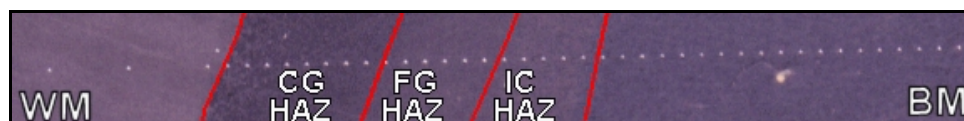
Weld Coupon "I" Hardness Traverse Locations
